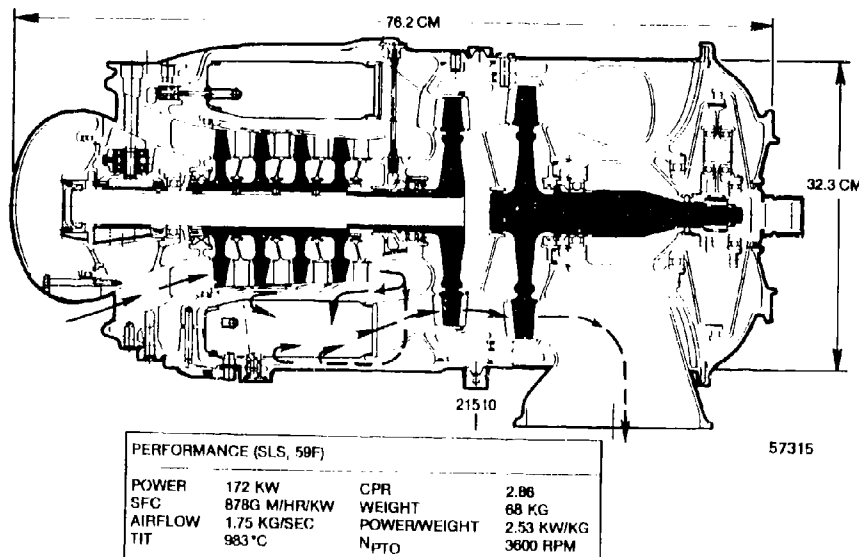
MODEL JFS 206 JET FUEL STARTER.
